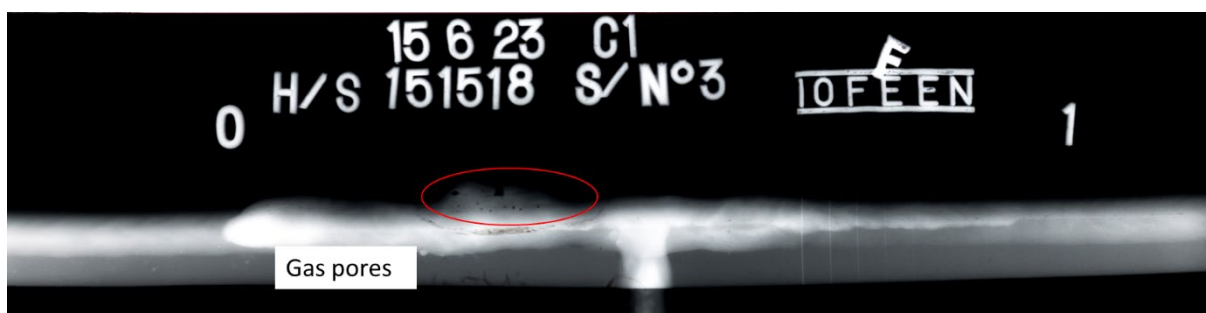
Radiograph of circumferential weld in a pressure vessel. Porosity in the weld is highlighted in red.
